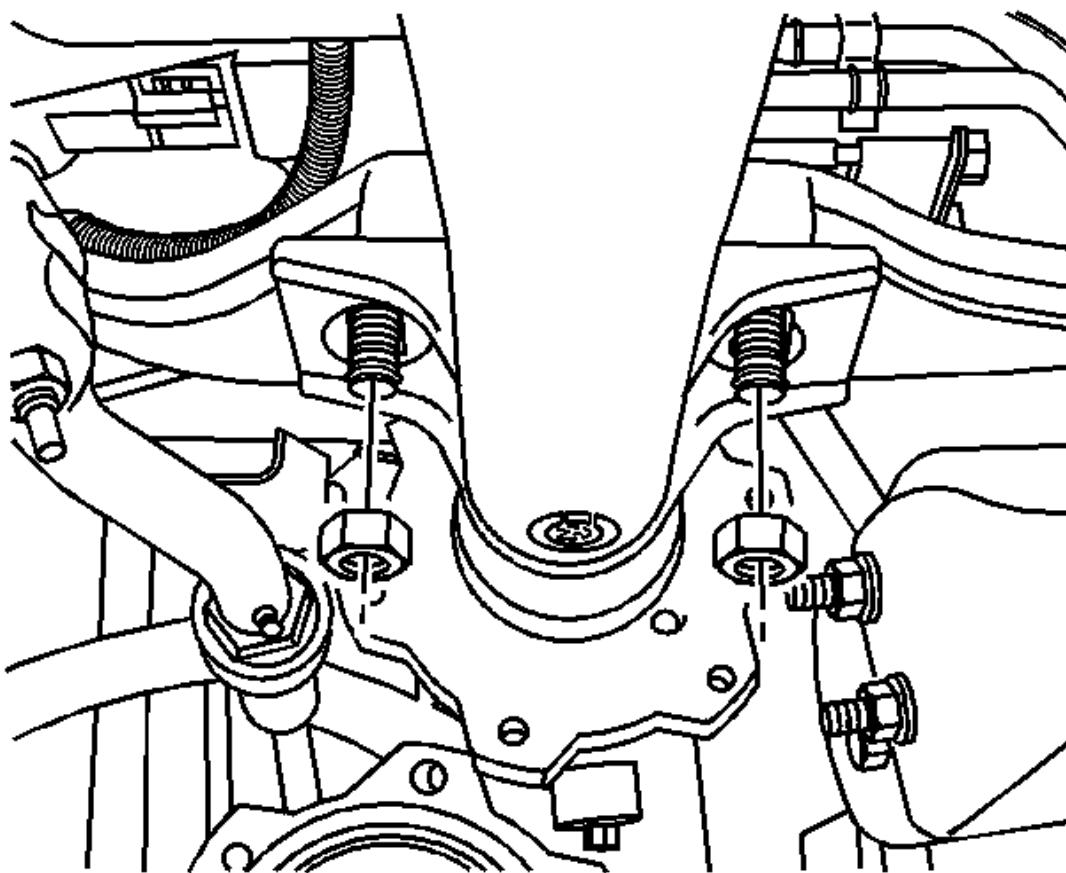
Front Drive Inner Axle Shaft Housing Nuts
